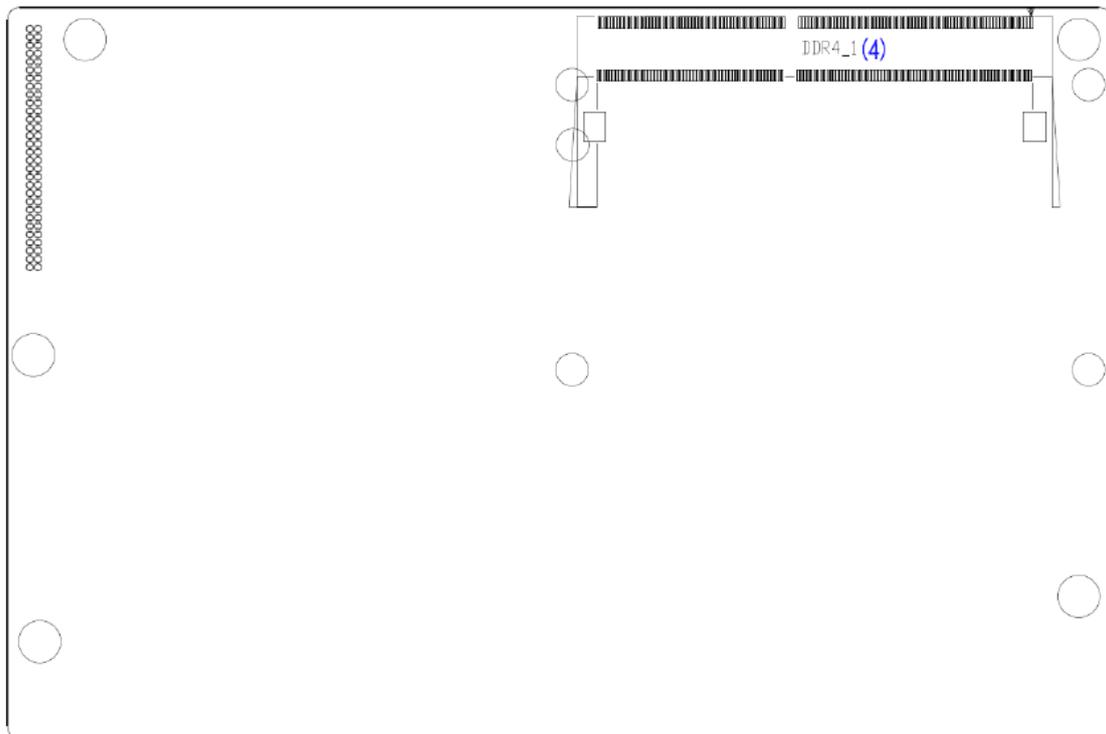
Jumpers and Connectors Location- Board Bottom
